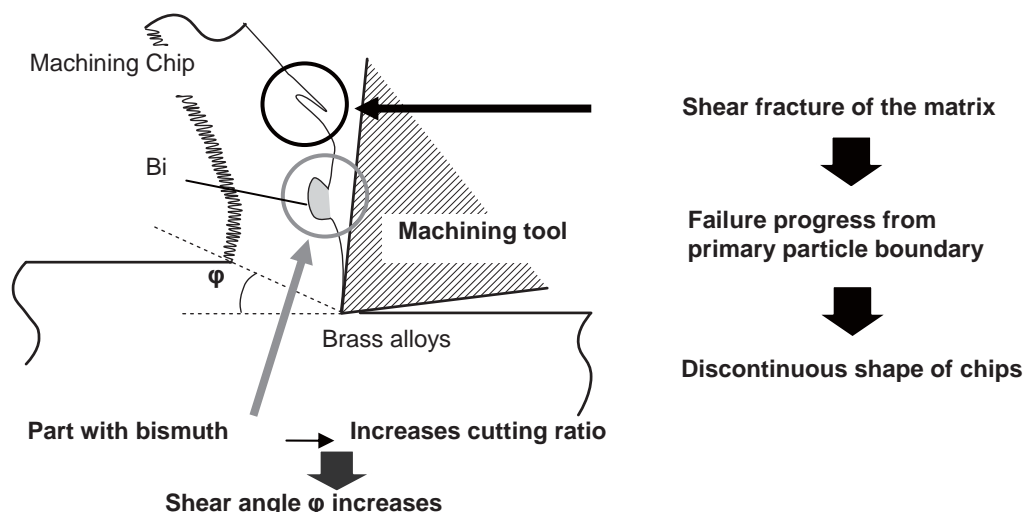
Model of the machining mechanism of brass extruded material with Bi.
